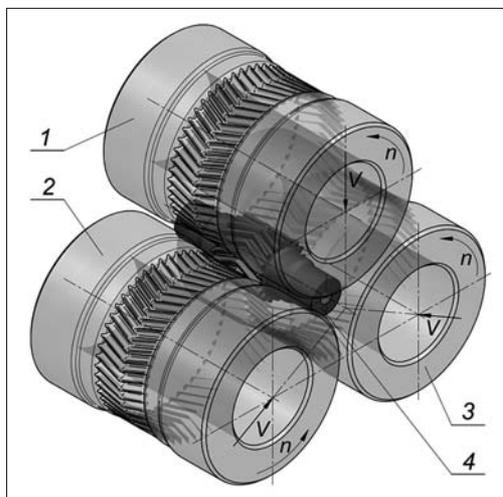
Design of the rotary compression process for producing multi-stepped hollow shafts with gears
